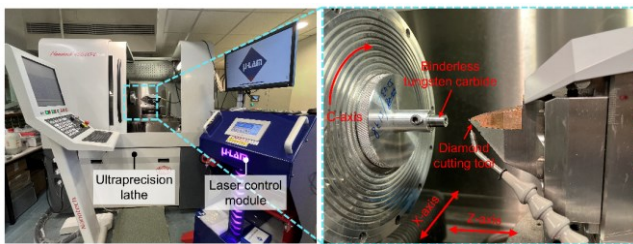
Fabrication setup of aspherical BTC mold inserts by laser-assisted turning.
